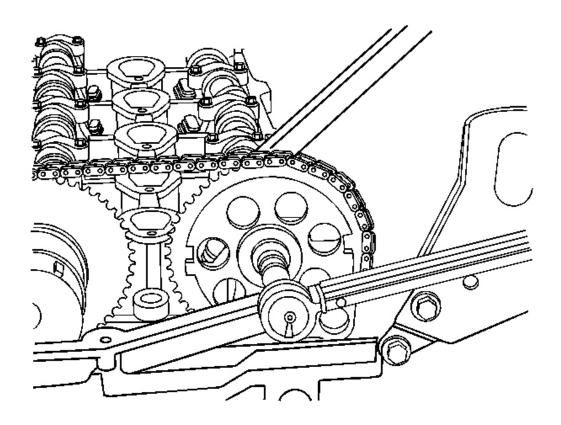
Tightening Intake Camshaft Sprocket Bolt Courtesy of GENERAL MOTORS CORP.
